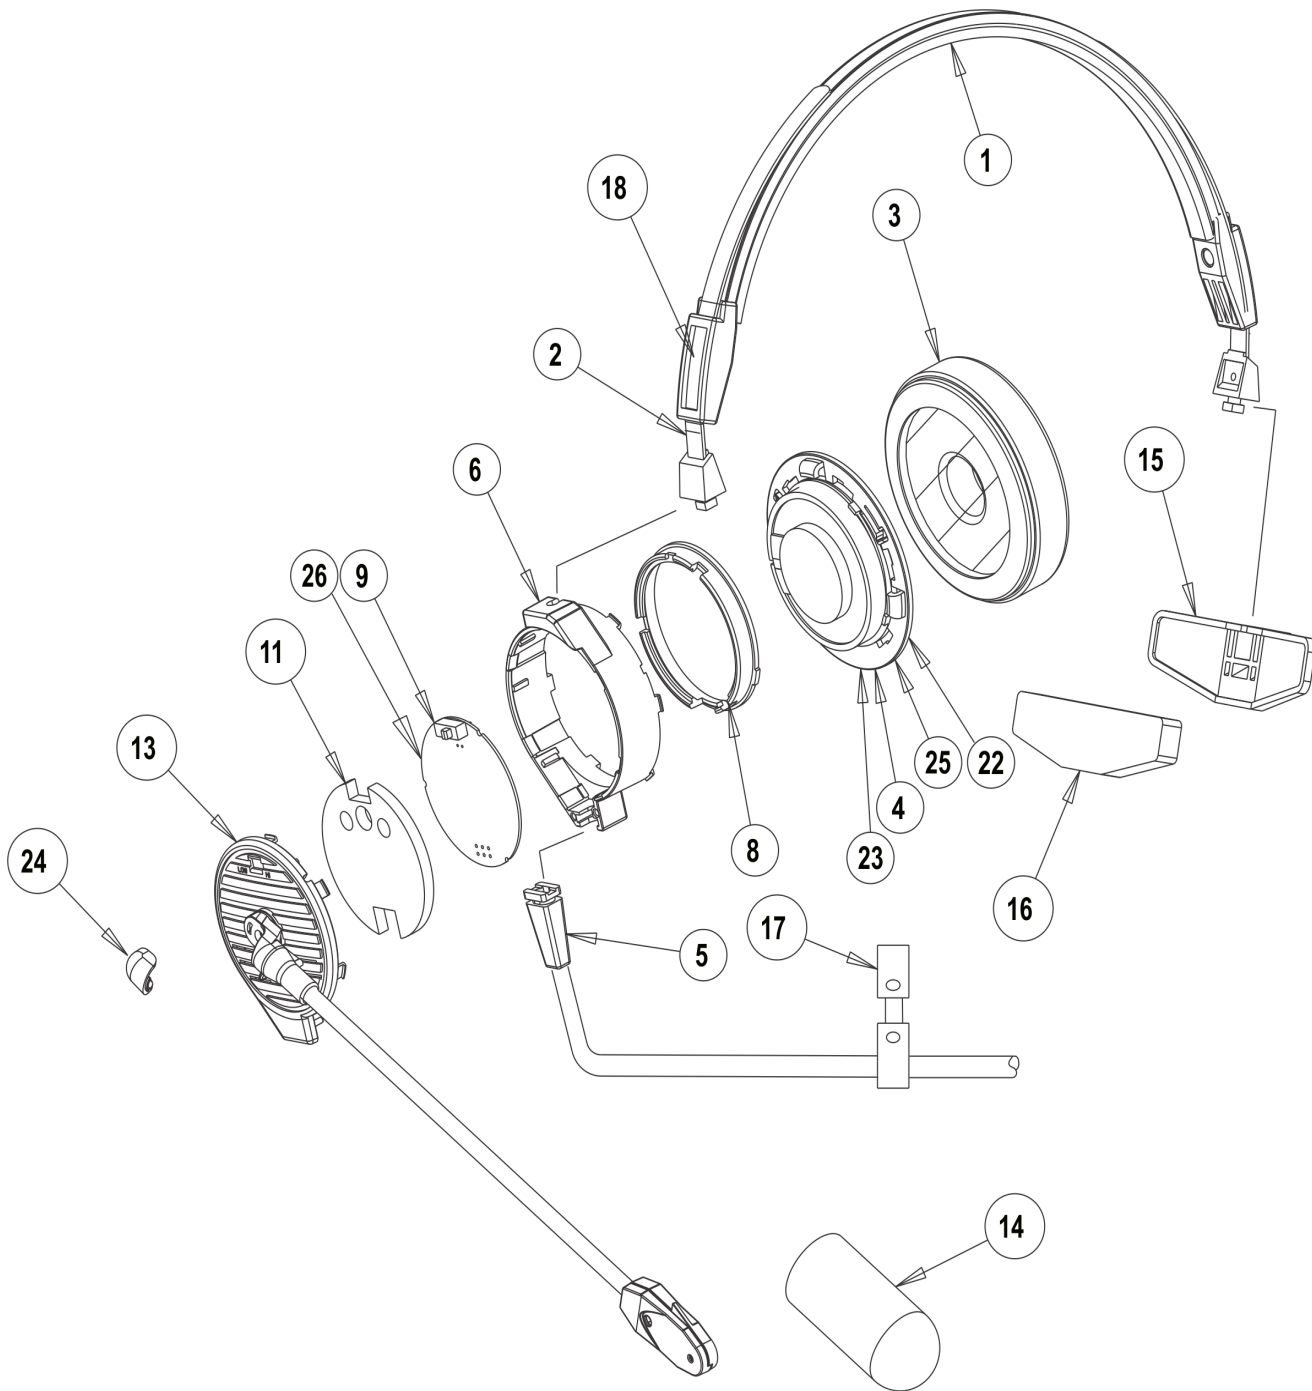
Airman 850 Headset, Single Sided, Exploded View
